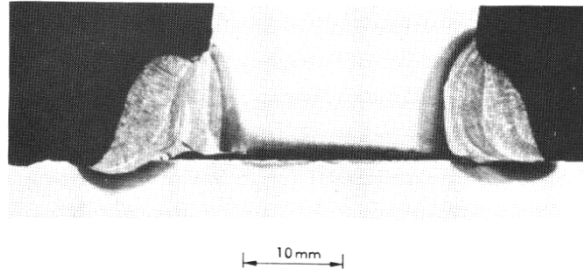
Section of the fillet weld between the flange plate (horizontal) and the main bracing (vertical) – poor penetration [1.4]
